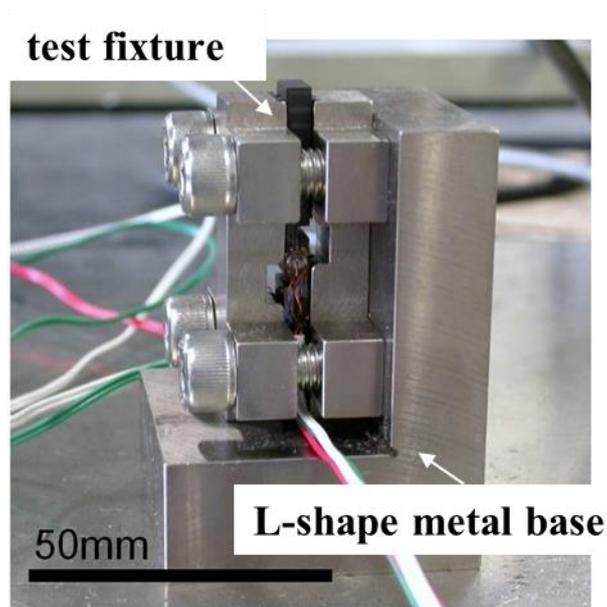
Double notched compression (DNC) test specimen assembled with test fixture.
